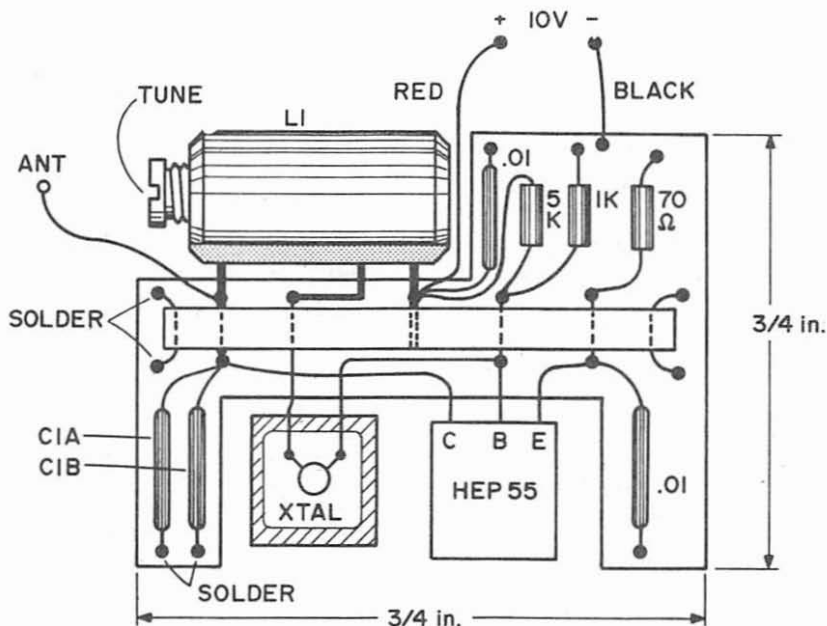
Blowup top view shows layout of subminiature oscillator. Actual physical size of unit will be 3/4 in. square.
